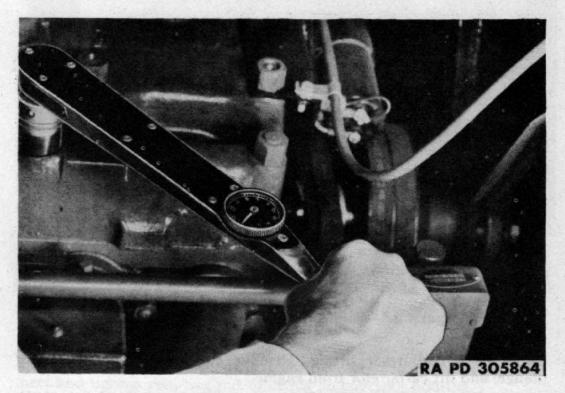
Tightening Cylinder Head Nuts with Wrench 41-W-3630
